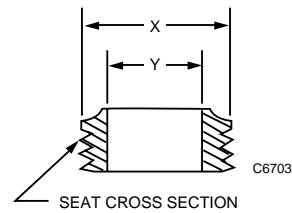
V5011A, C, F, and G Valve Seat Dimensions.
